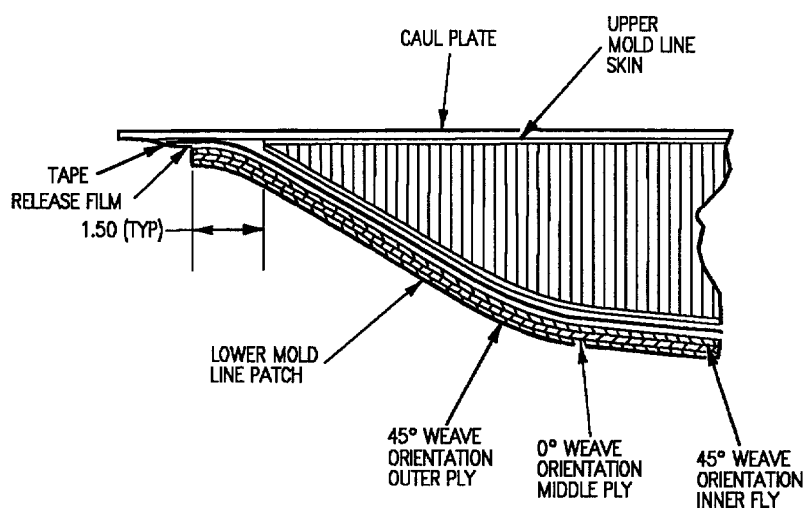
Inboard Aft Corner Repair (Sheet 2)
